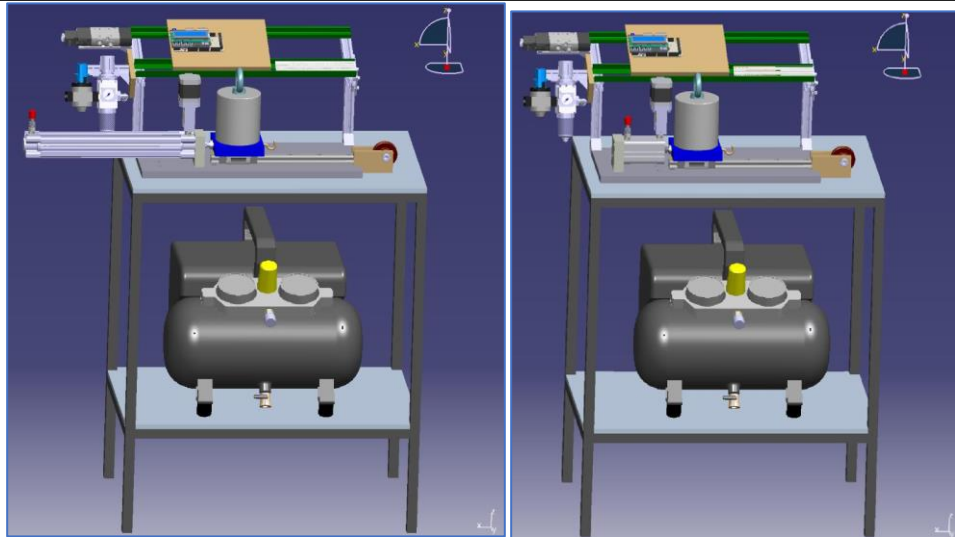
Experimental bench equipped with a pneumatic cylinder Ø32 250 mm/40mm stroke designed in CATIA PLM Express V5-6R2023
